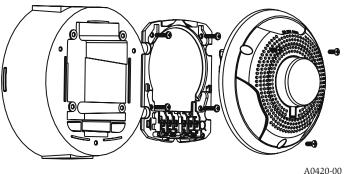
OUTDOOR WALL MOUNT PRODUCT WITH METAL WEATHERPROOF BACK BOX:
